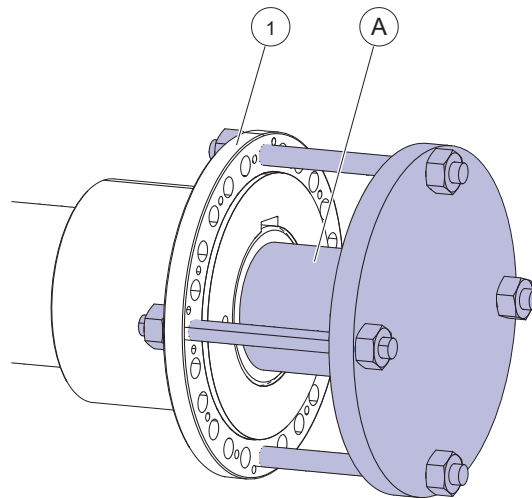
Screwing on the compact, connecting the hydraulic unit
